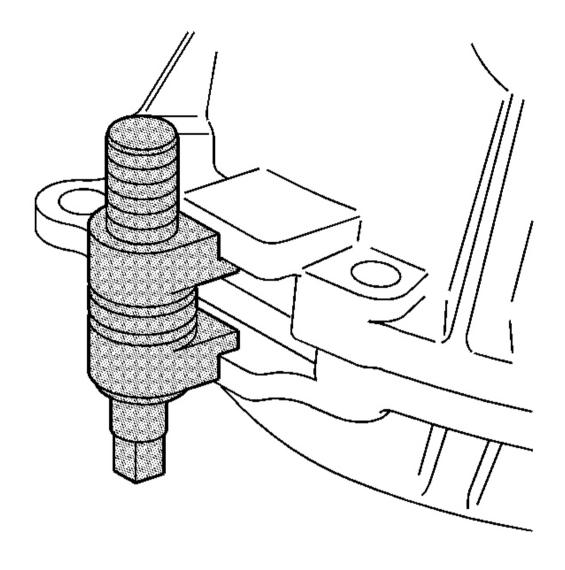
View Of J 45358 Installed Between The Tabs On The Case Halves Courtesy of GENERAL MOTORS CORP.
